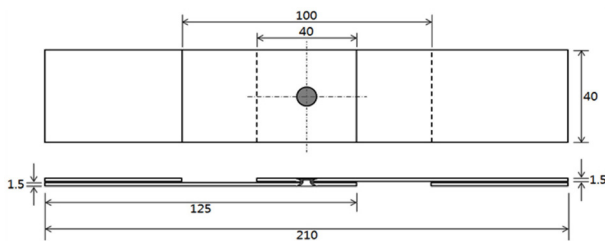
Geometry of the SPR tensile-shear specimen (mm).
